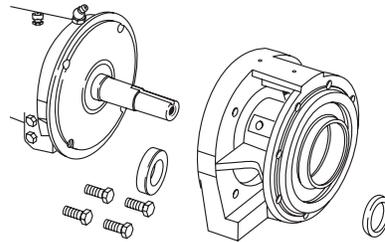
2520 Bracket and Slinger Seal Flexible Cup and Stationary Seat Removed.
